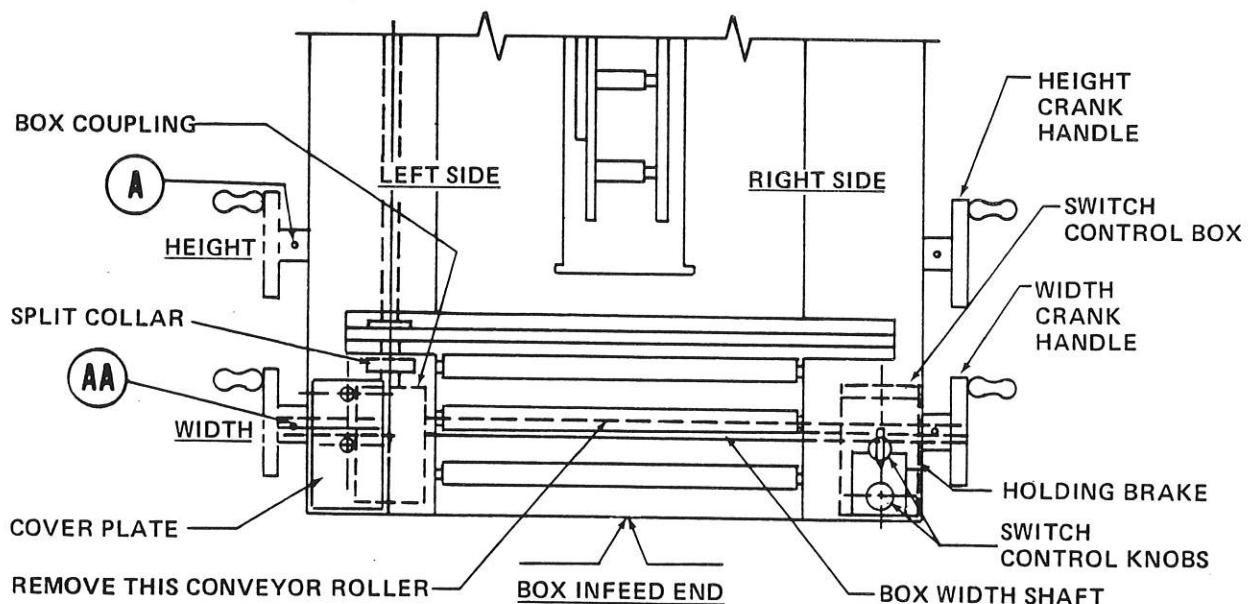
RIGHT - LEFT HAND OPERATION - TOP VIEW
